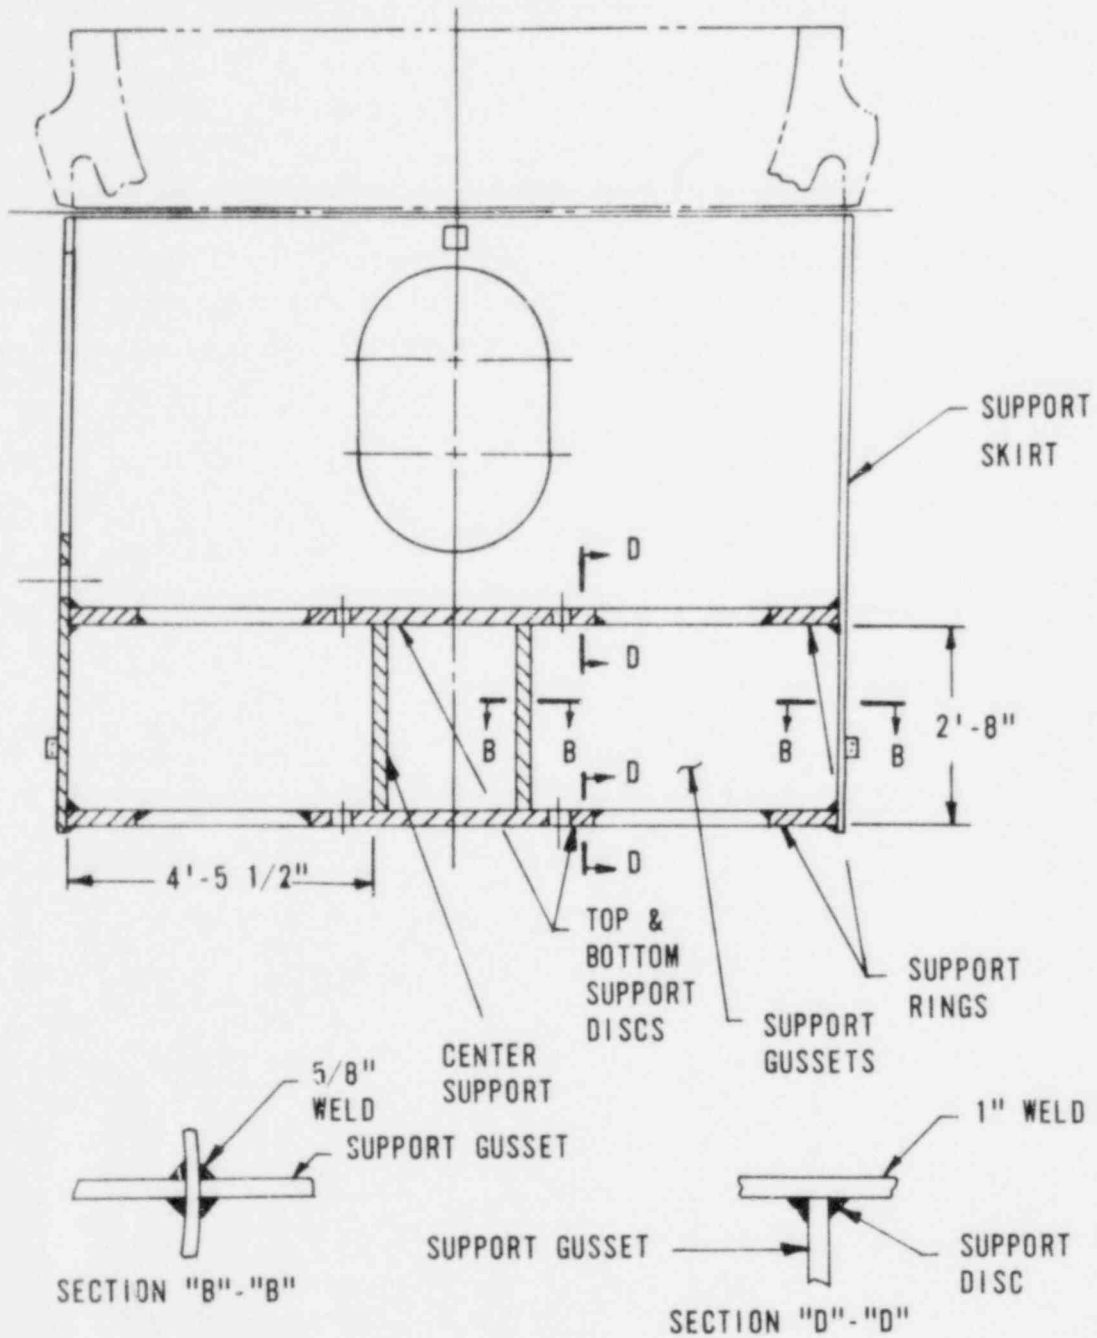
OTSG Support Skirt Assembly, Plan View
